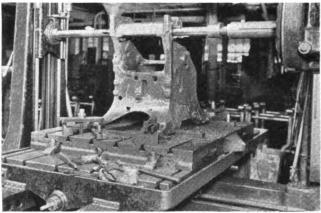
Boring maishaft holes in Chandler & Price "Craftsman" Automatic Feeding Pres
